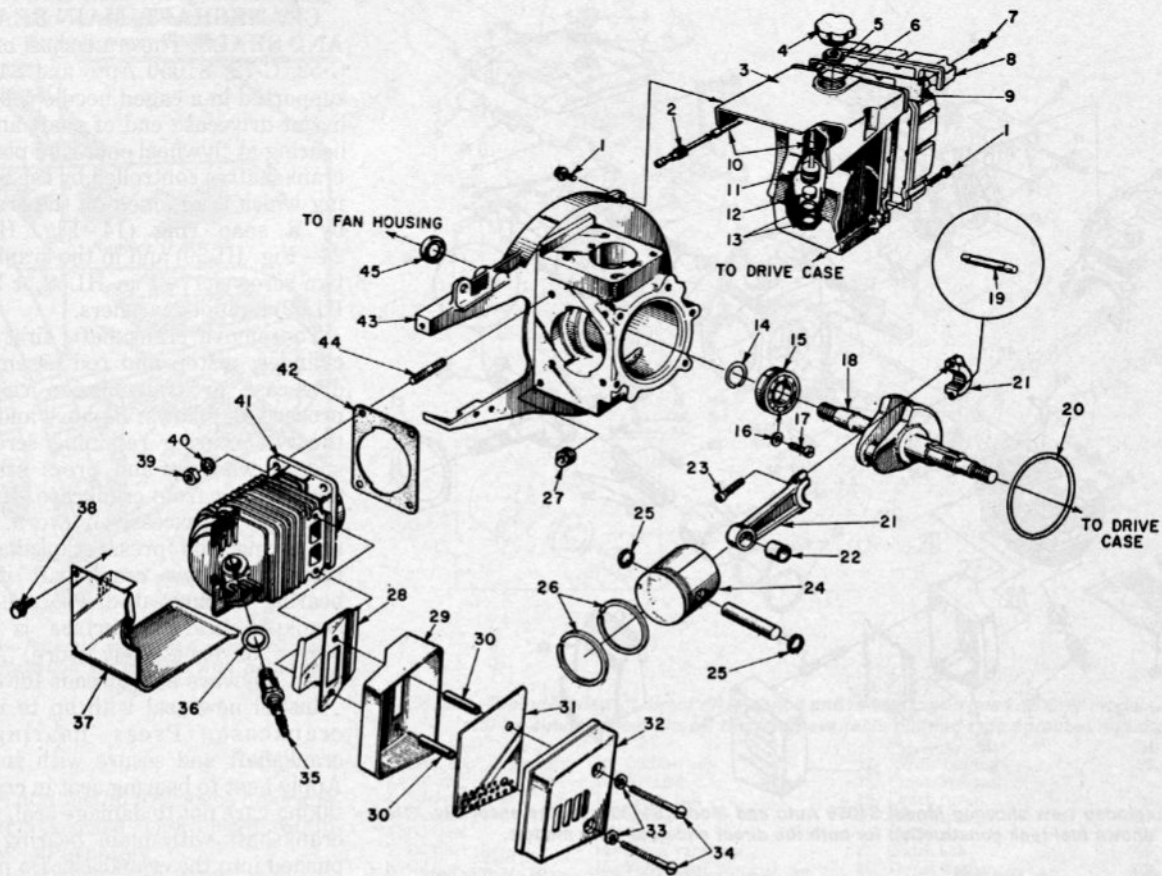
Exploded view of powerhead and fuel tank similar to Model C-52 and C-72. Gasket (9) is no longer used. Homelite cement No. 22788 is used in place of gasket to seal between tank and cover.
